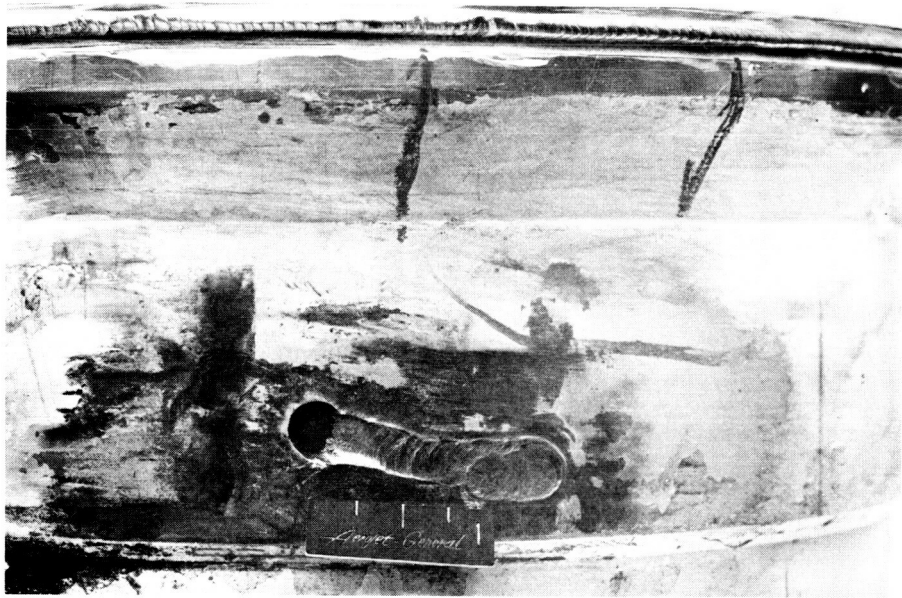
Result of stator housing bouncing on base mount locating pin during environmental testing.
